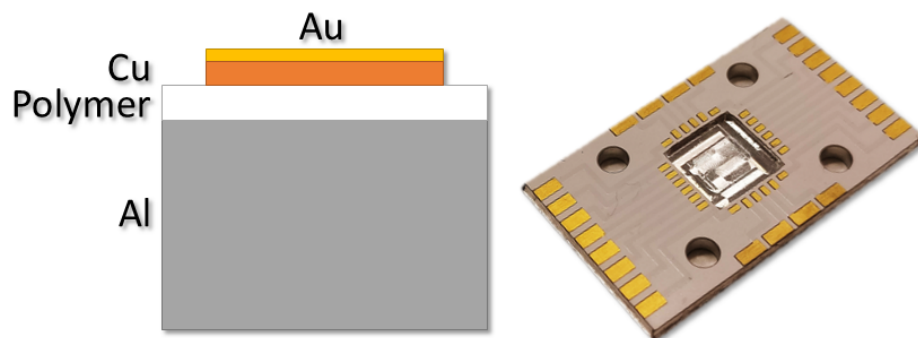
Aluminium circuit board: schematic cross section (left), photograph (right).
